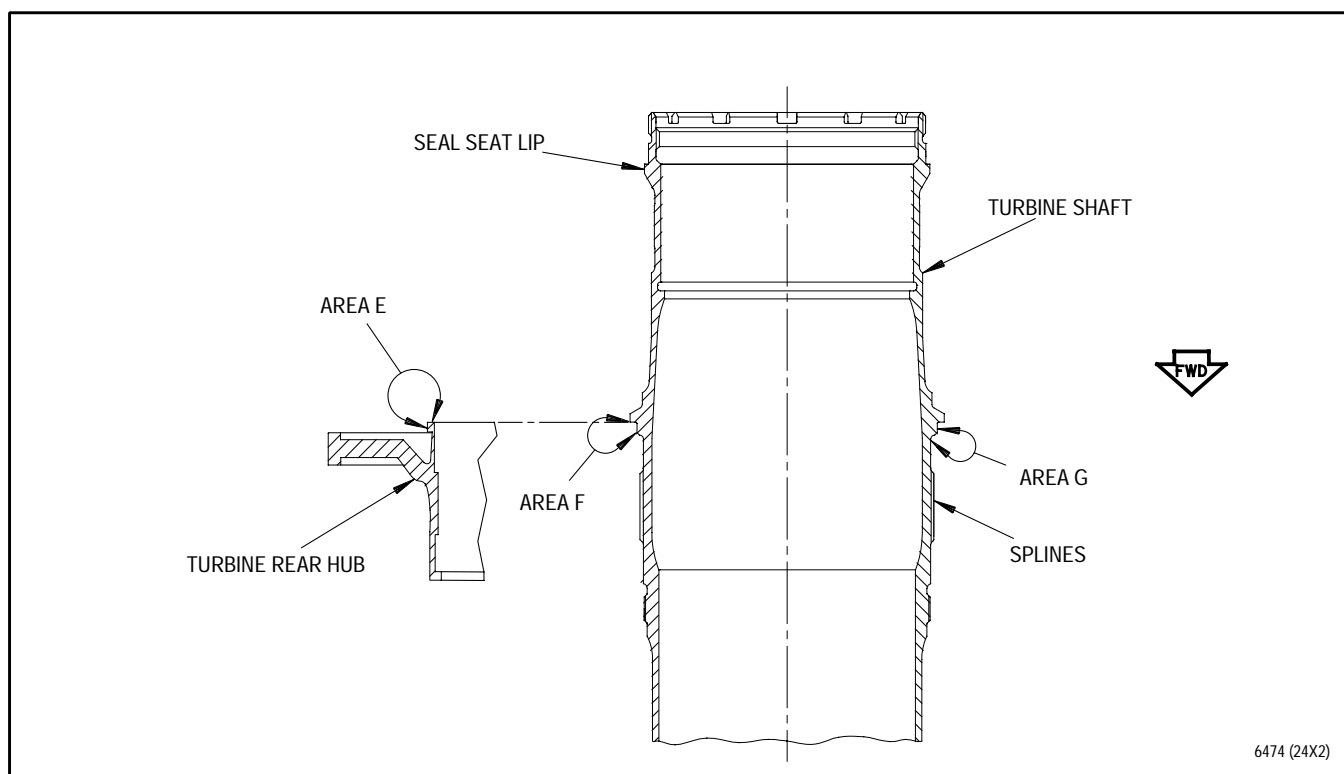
Front Compressor Drive Turbine Shaft and Turbine Rear Hub - Inspection Areas
